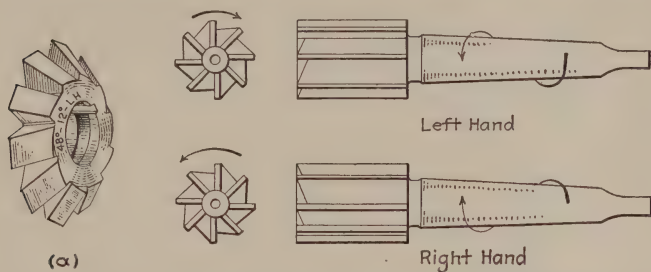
Right-hand and left-hand cutters; (a) shows 48- and 12-deg. left-hand double-angle cutter.
